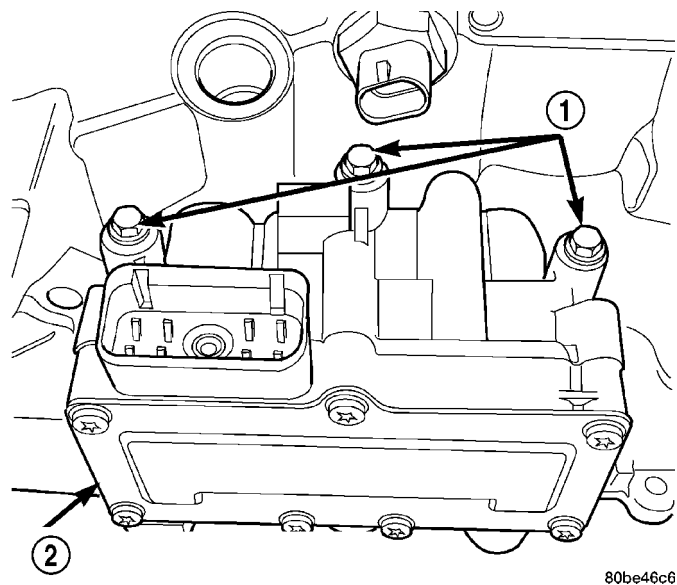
Solenoid/Pressure Switch Assembly-to-Case Bolts
